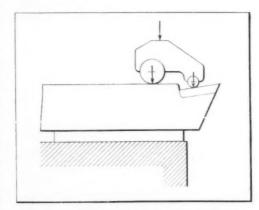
When grinding a brazed carbide-tipped tool by the high-temperature technique a clamp of the type here shown may be employed, so that both the shank and the tip are securely held
